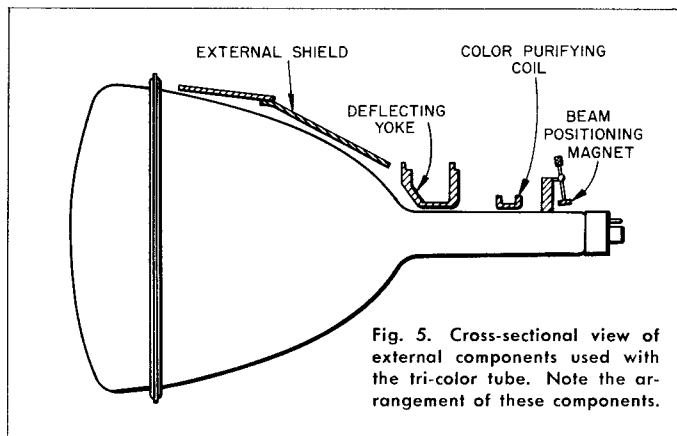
Cross-sectional view of external components used with the tri-color tube. Note the arrangement of these components.
